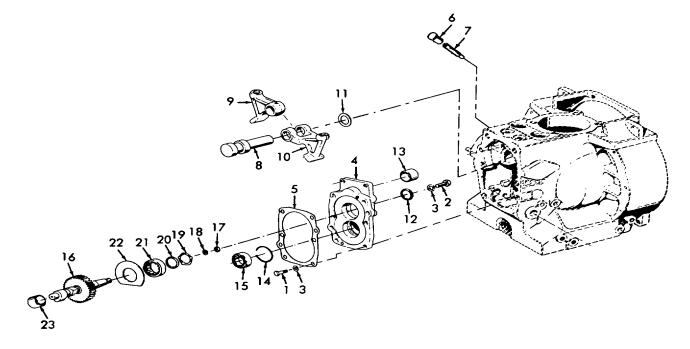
Timing Cover and Camshaft Removal/Disassembly.
